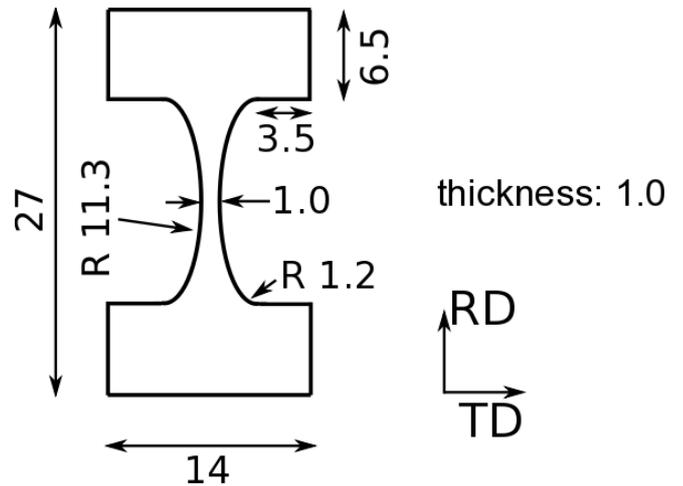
Geometry of specimens used - cracks initiate in the central part.
